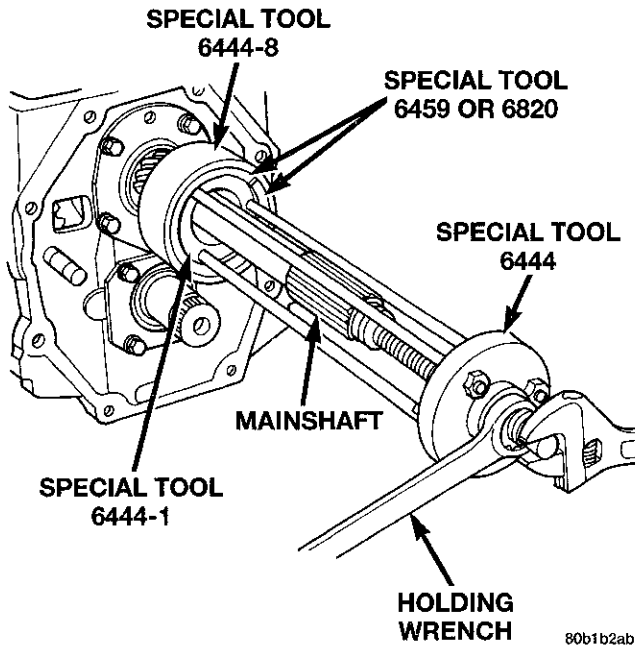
Removing Fifth Gear From Mainshaft Splines
